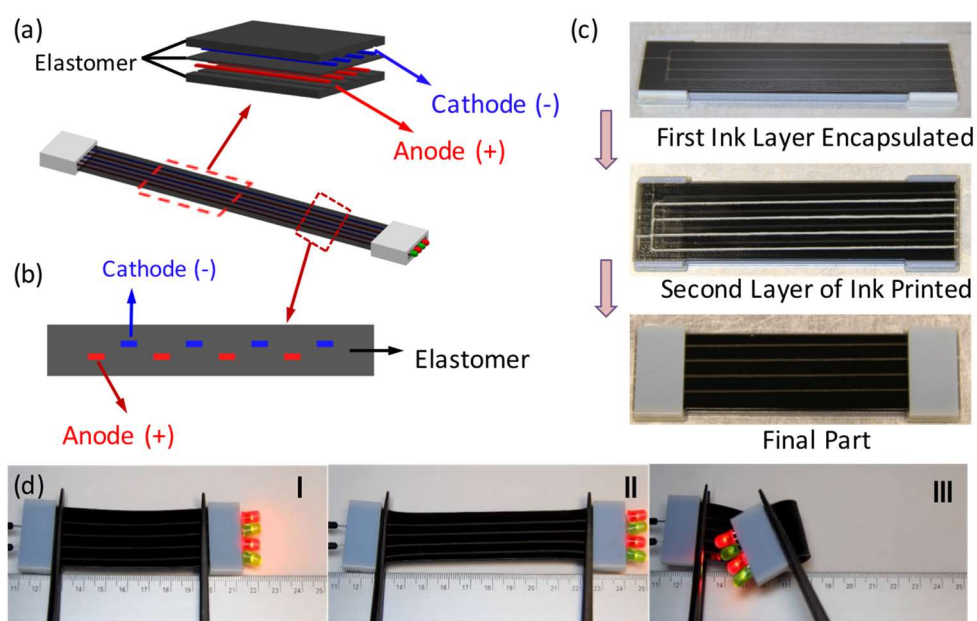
Fully printed stretchable cable by embedded silver wire into polyJet 3D printed parts: (a) The design of the cable. (b) The cross-section of the stretchable part of the cable. (c) The images of the printed part during the printing process. (d) Embedded silver wires in elastomer as circuits during stretching. Images of the printed cable under tensile strain of ( I ) 0% and (II) 40% and (III) under folding.
